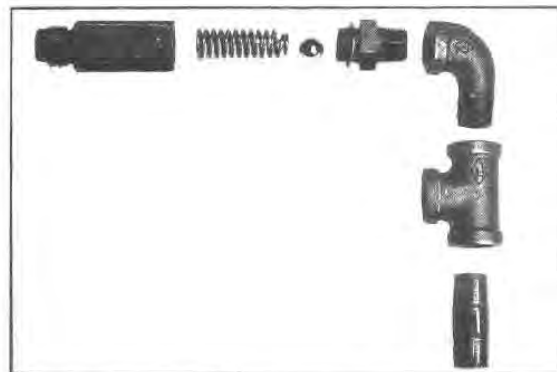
Charge Pressure Control and Safety Check Valve Components
